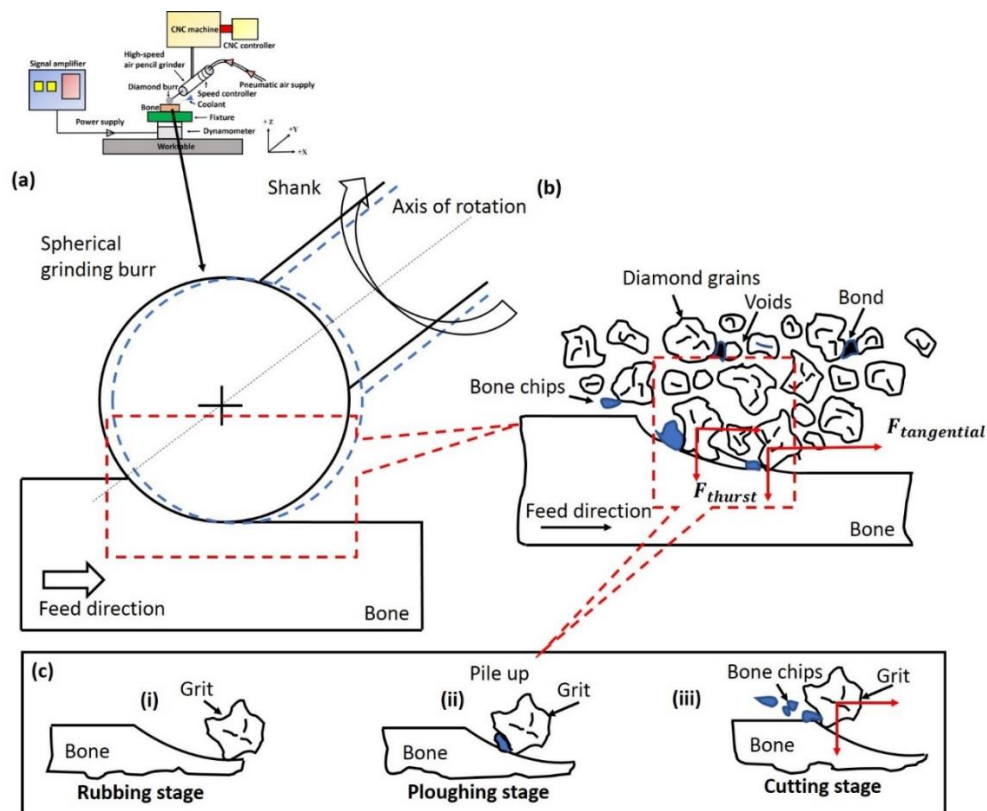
Schematic representation of the bone grinding process (a) bone and grinding burr contact (b) different stages of removal of bone chips (c) engagement and disengagement of diamond abrasive grits with bone.
